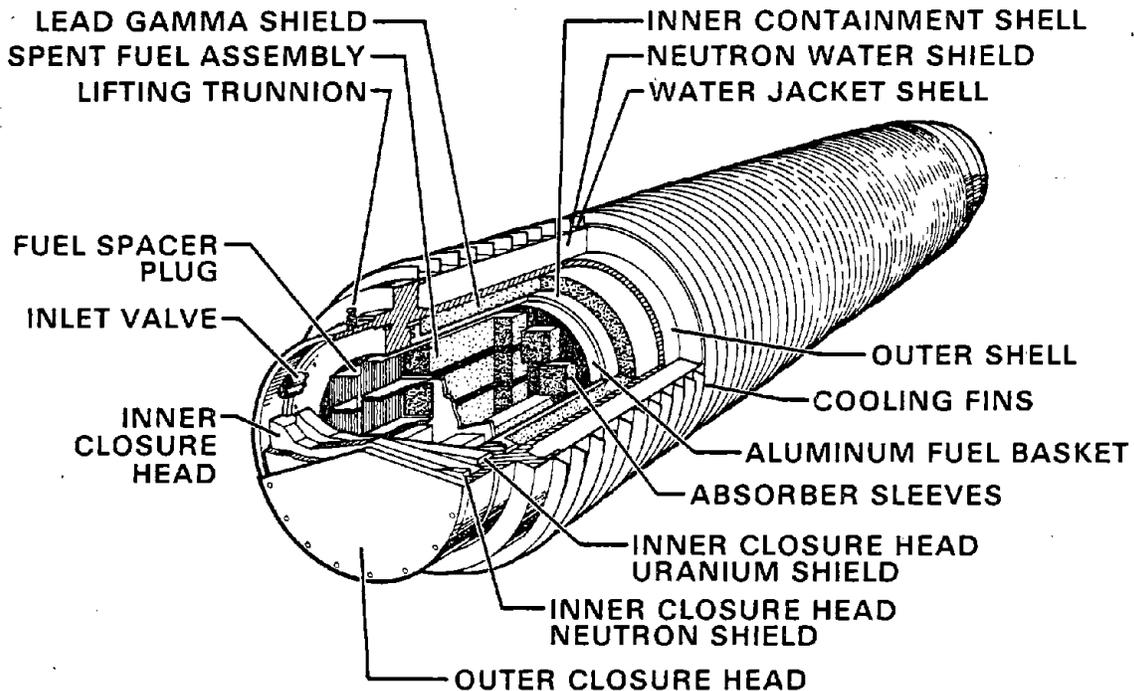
NLI-10/24 Rail Cask Assembly
